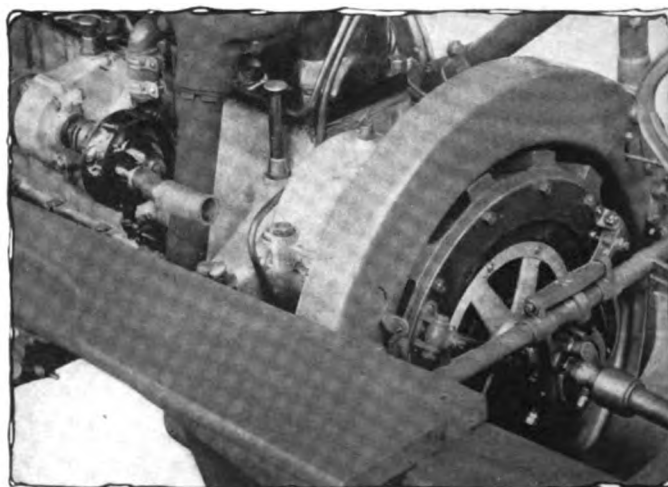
View of the clutch and rear suspension of the Deasy motor
